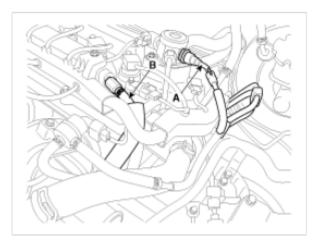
Identifying Fuel Hose And Positive Crankcase Ventilation Hose Courtesy of HYUNDAI MOTOR AMERICA
